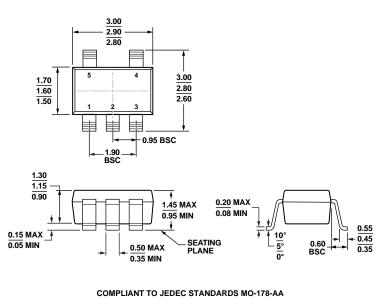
5-Lead Small Outline Transistor Package (SOT-23) (RJ-5) Dimensions shown in millimeters
